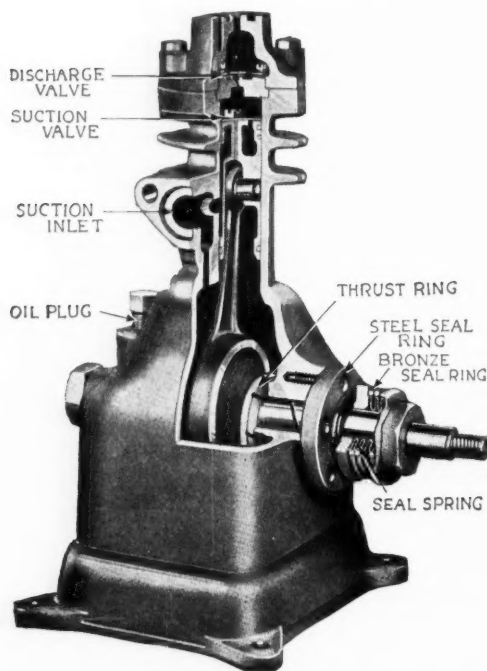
Cut-away view of a Servel electric refrigerator, showing details of internal construction. Splash lubrication is employed, the oil being carried in the base. This is a methyl chloride type of machine.
